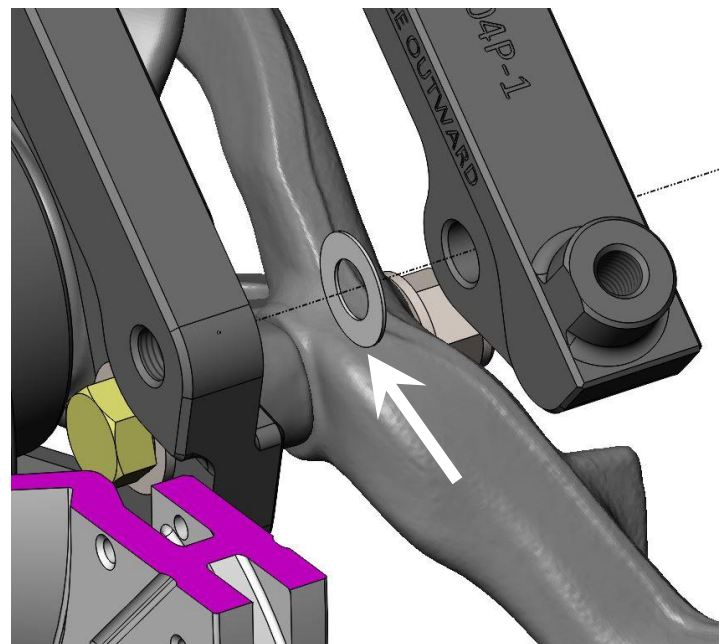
Shim Location (Use For Future Caliper Shimming Process)
